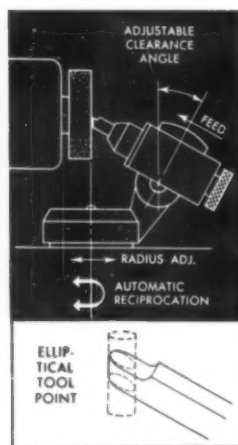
Elliptical tool point with decreasing clearance angle for conventional straight-line work. Upper sketch shows arrangement of tool sharpening machine.
